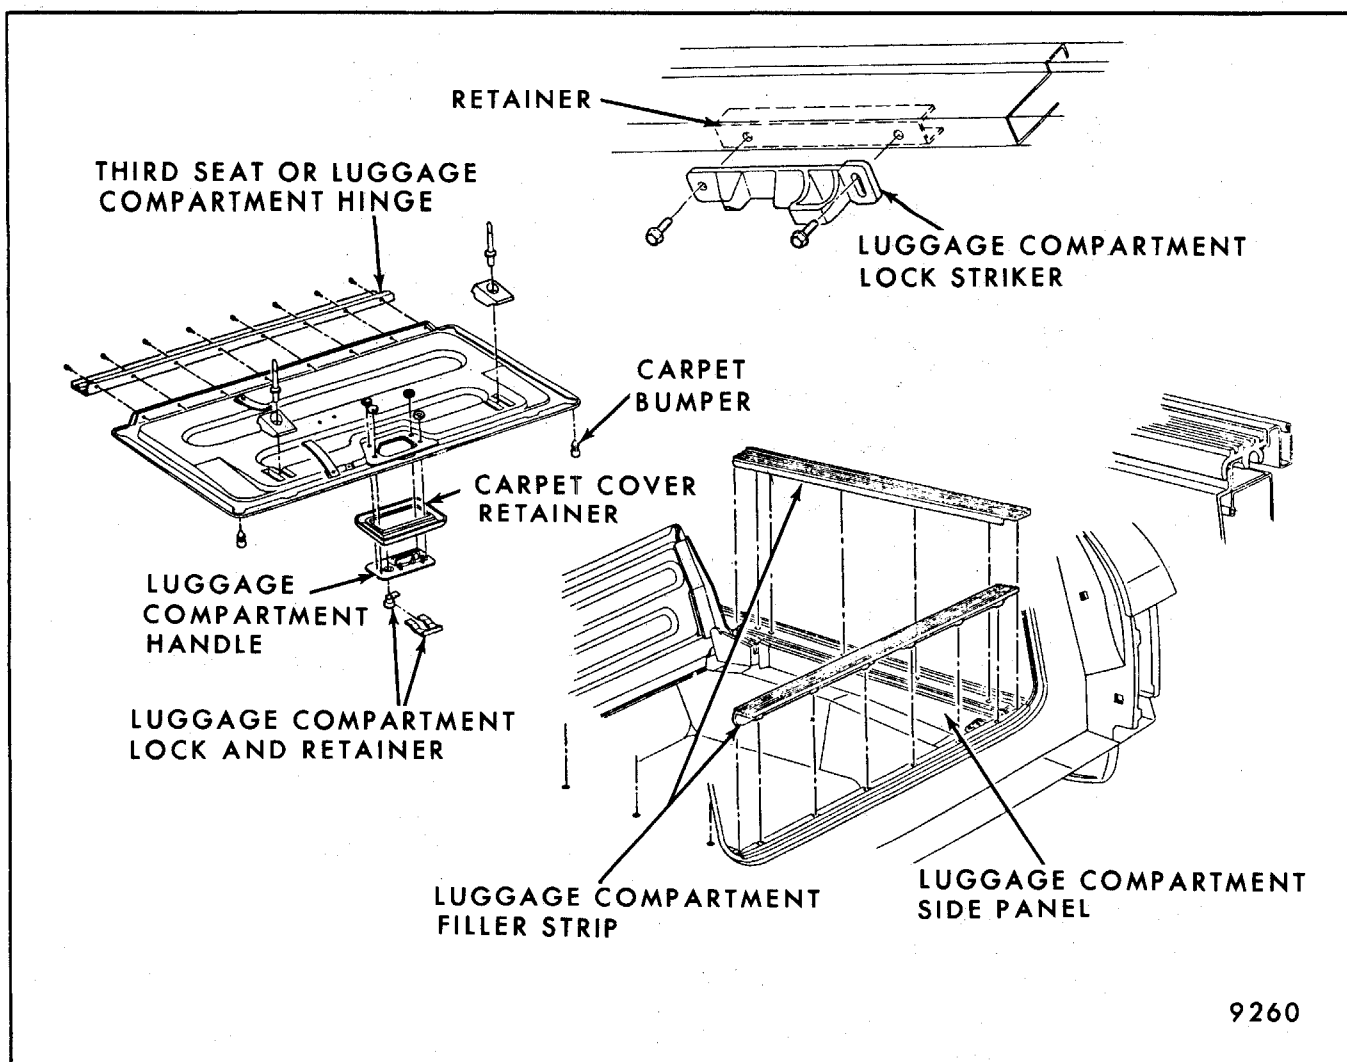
Luggage Compartment and Lock Installation - "B" Station Wagon Styles
